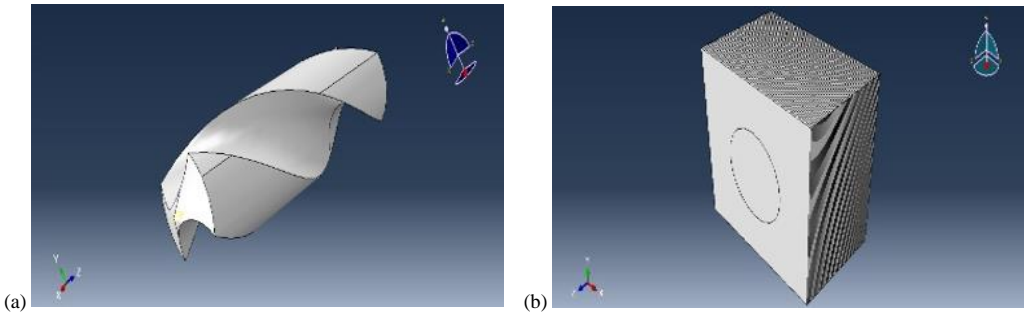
CAD of the (a) geometric drill bit (b) workpiece/composite used.
